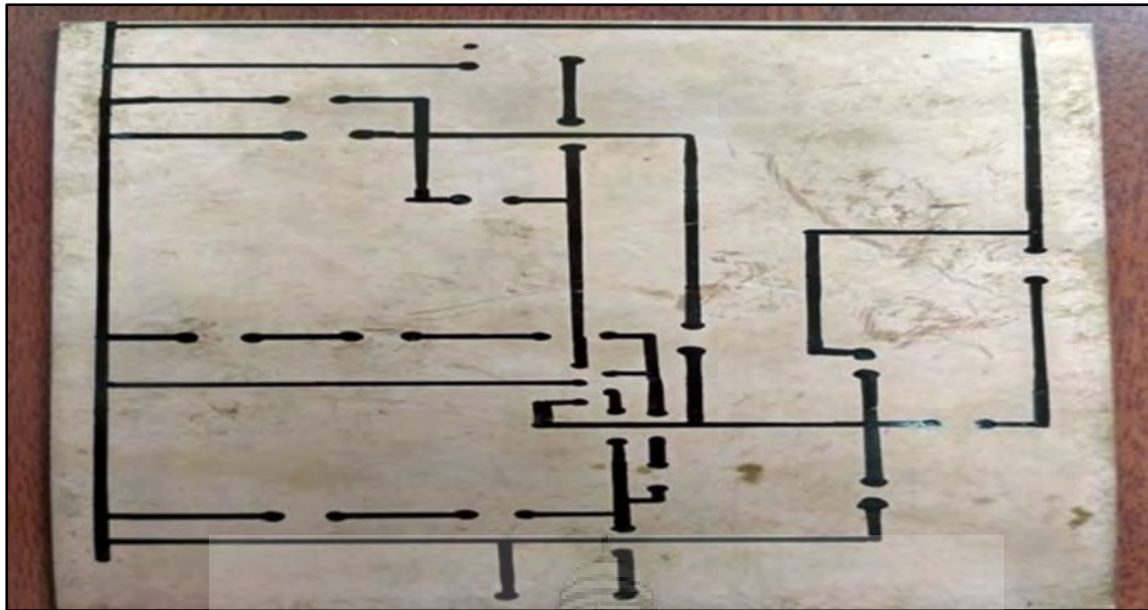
PCB laser Marking of IC CD4440 Amplifier
